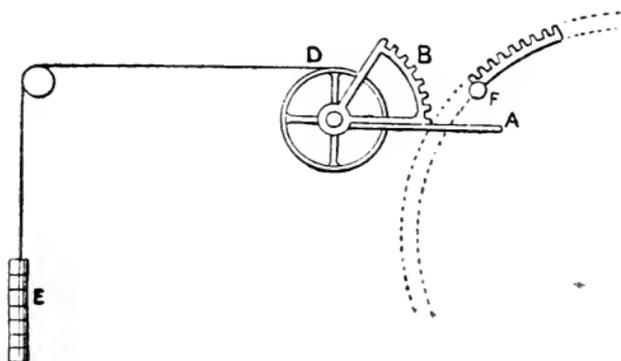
“Web” Laying-on Motion—Perfecting Machine.
